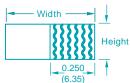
Dimensions for POLASHEET Die-Cut Gaskets
